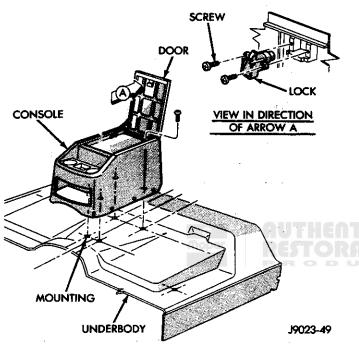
Console INTERIOR TRIM (FIGS. 12 AND 13)
